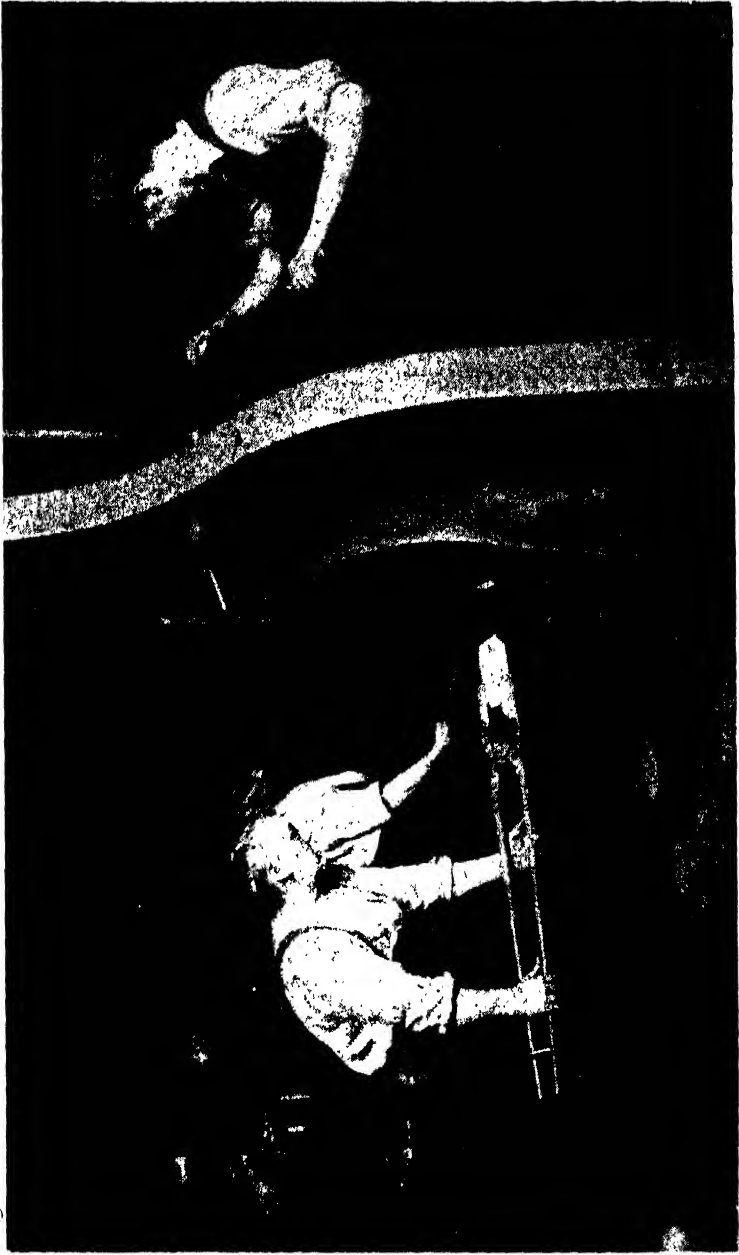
ANOTHER VIEW OF THE HAMMER FORGING OF STEEL
